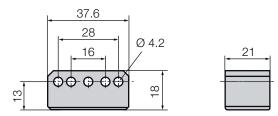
Installation dimensions for BTL6-A-3801-2
